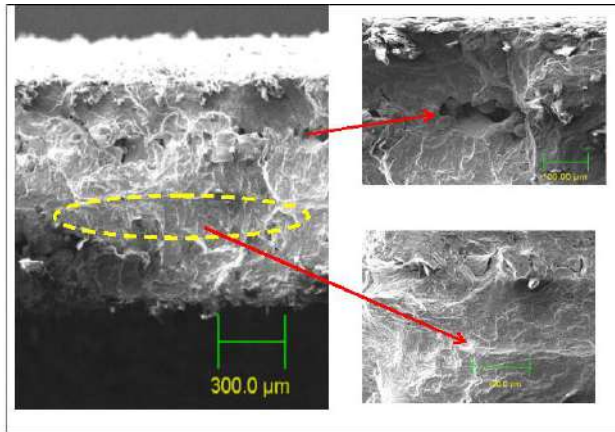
Micrograph of fracture fatigue surfaces at high stress 1350 MPa for SLM part as fabricated ($R_a= 10\mu\text{m}$) to demonstrate different region of fatigue fracture surfaces.
